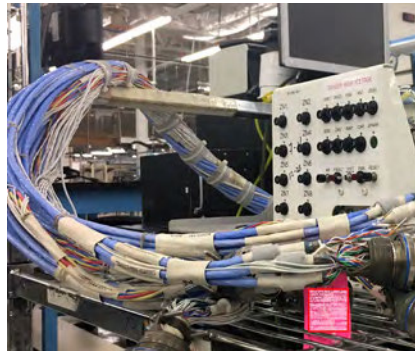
High complexity wire harnesses from MC integrated partners being staged for next step assembly.
